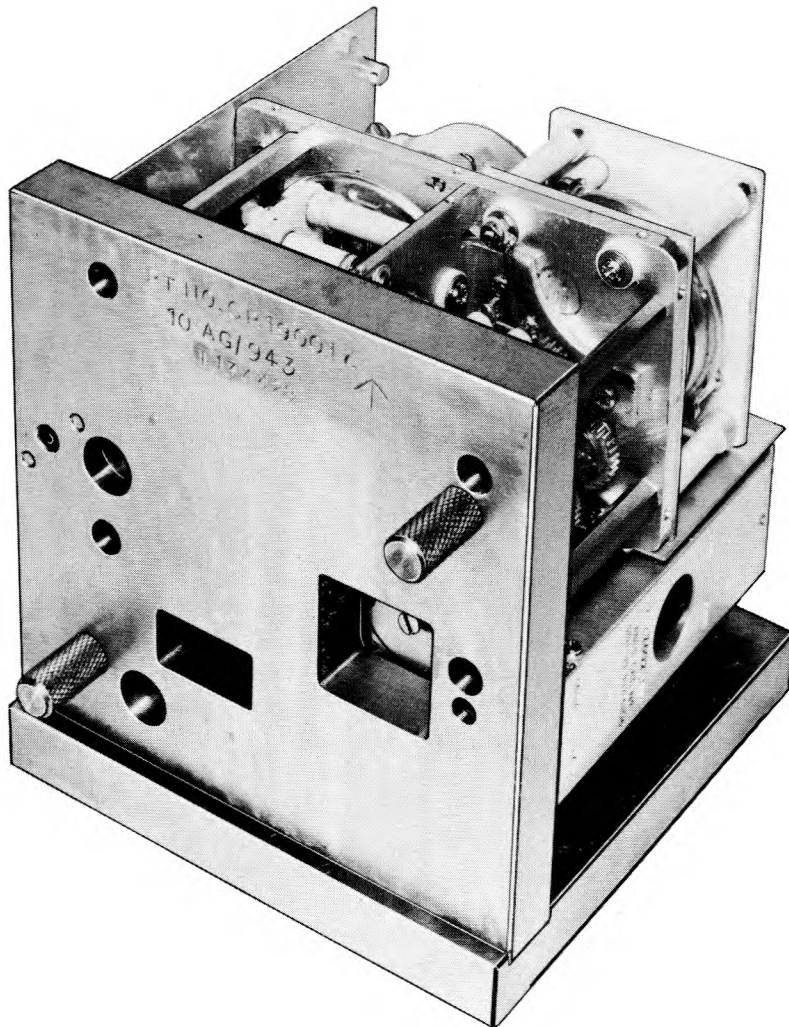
Checking fixture, Ref. No. IOAG/943,
